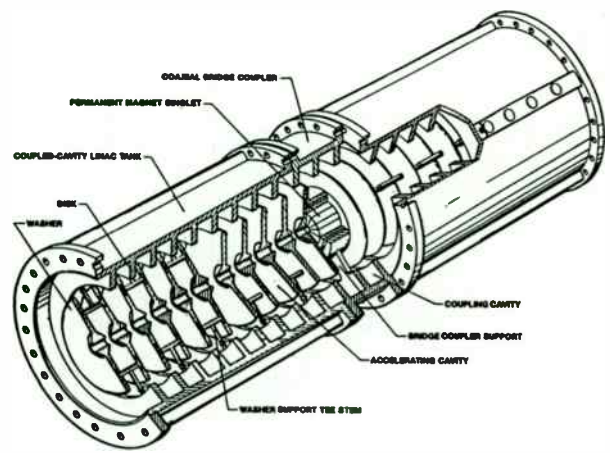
CUTAWAY VIEW OF A DISK-AND-WASHER ACCELERATOR STRUCTURE
